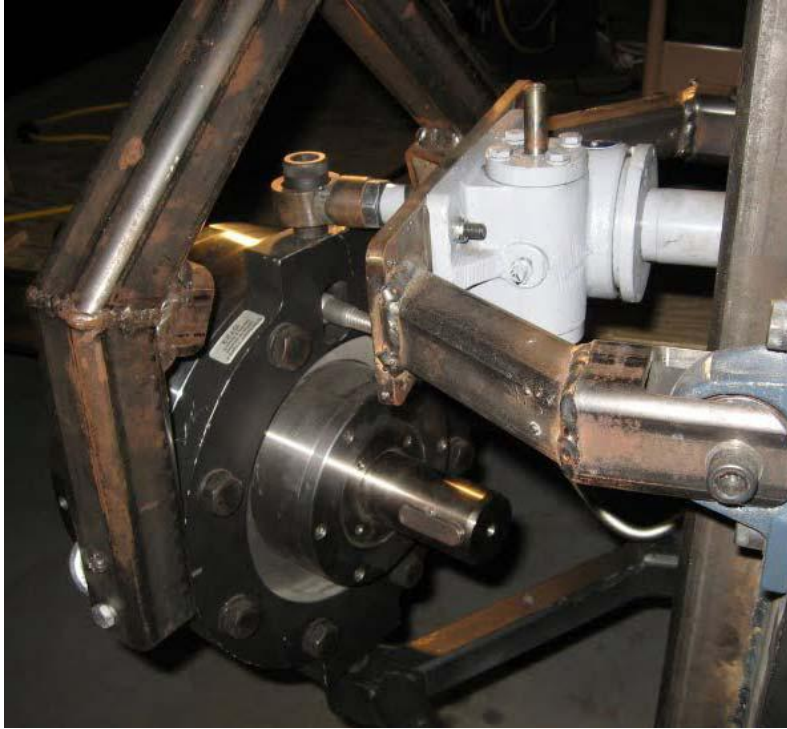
Steering Fork and Camber Mechanism During Fabrication. [Photo by author 2009]
